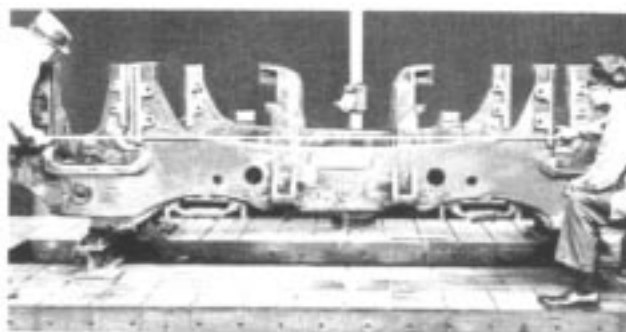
Six Wheel Swing Hanger Truck Frame Dimensions
